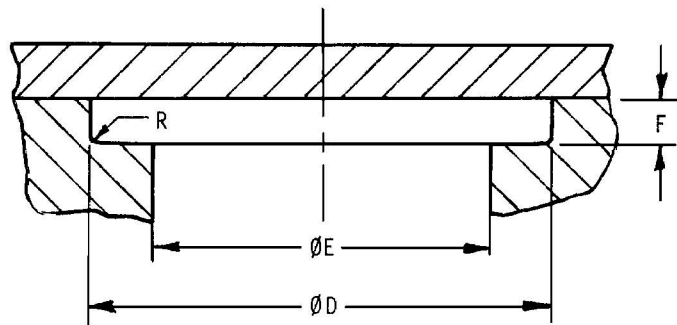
Axial C-Ring Groove, Internal Pressure
